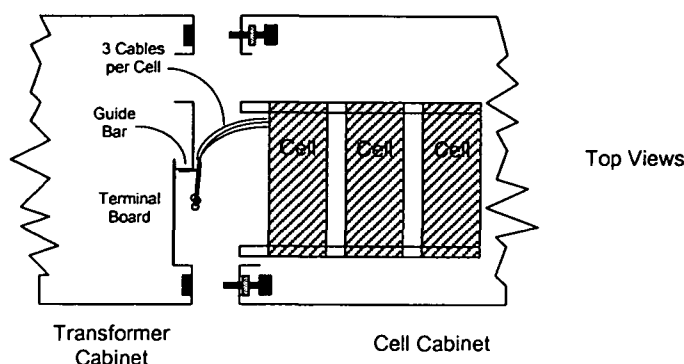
Top View of Guide Bar, Cell Wiring and Terminal Board
